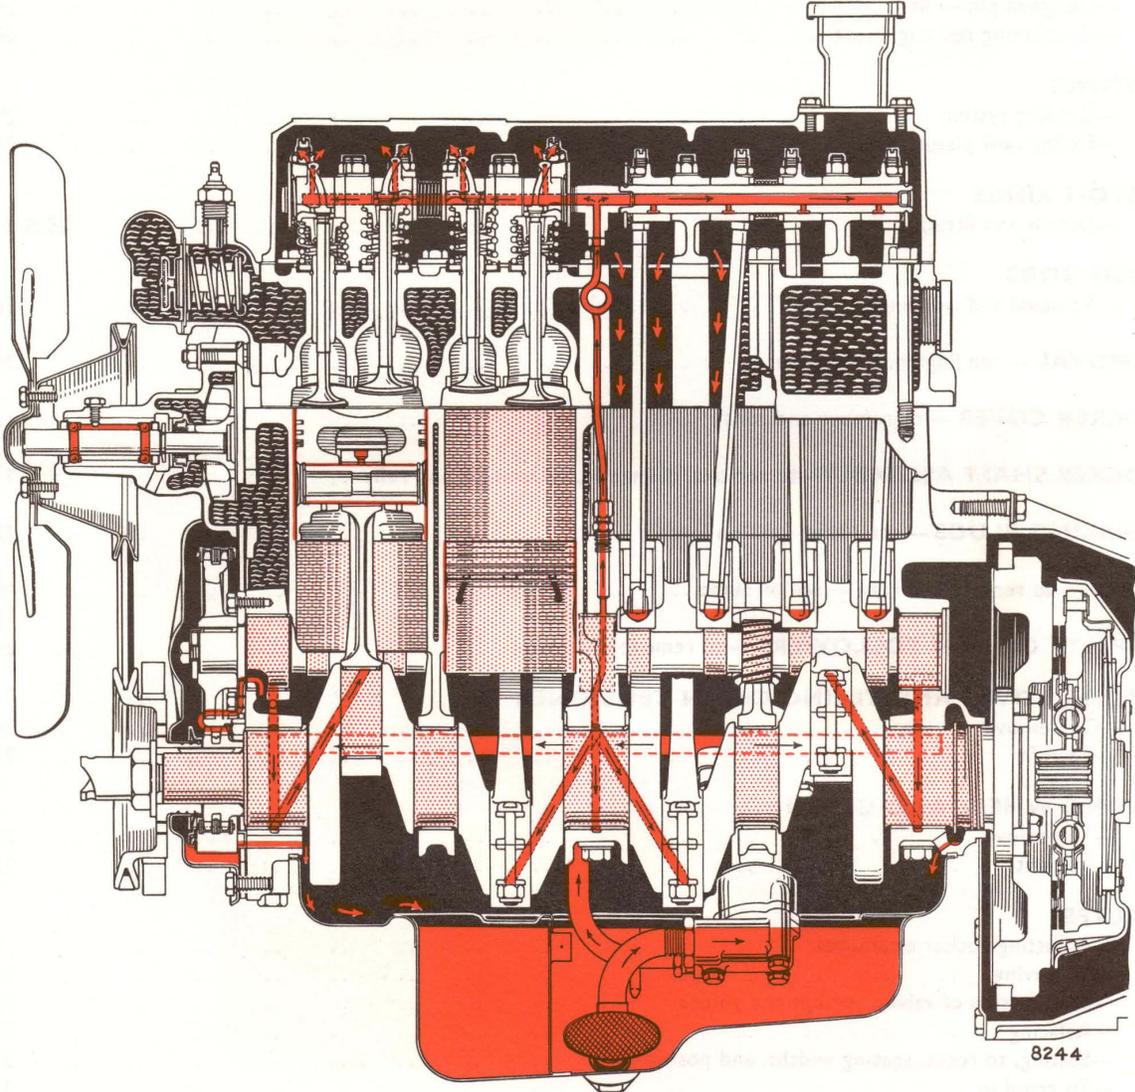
Engine—Longitudinal section of engine with aluminium cylinder head.
